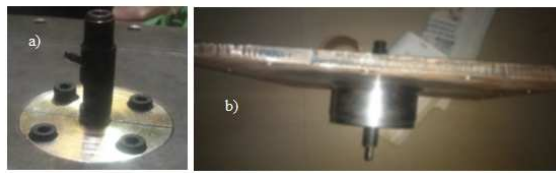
(a) Injector Holder (b) Head Combustion Chamber
